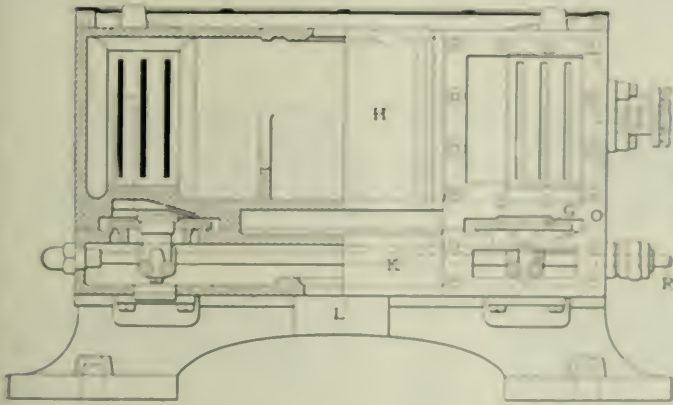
ELEVATION AND PART SECTION THROUGH STEAM CHEST
